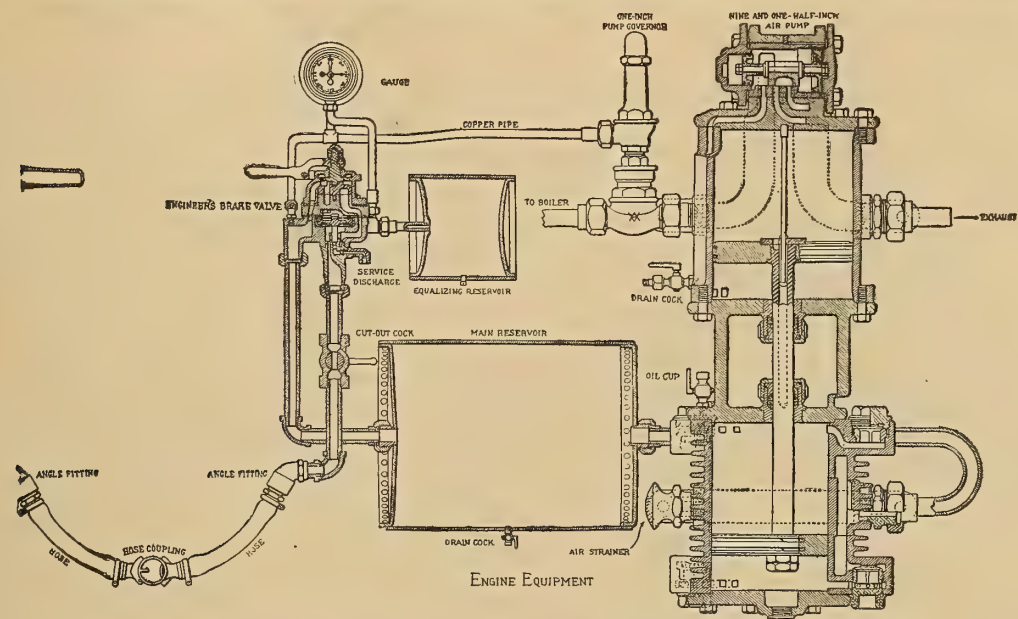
SECTIONAL VIEW, SHOWING GENERAL ARRANGEMENT OF APPARATUS. WESTINGHOUSE QUICK-ACTION AUTOMATIC AIR BRAKE.
